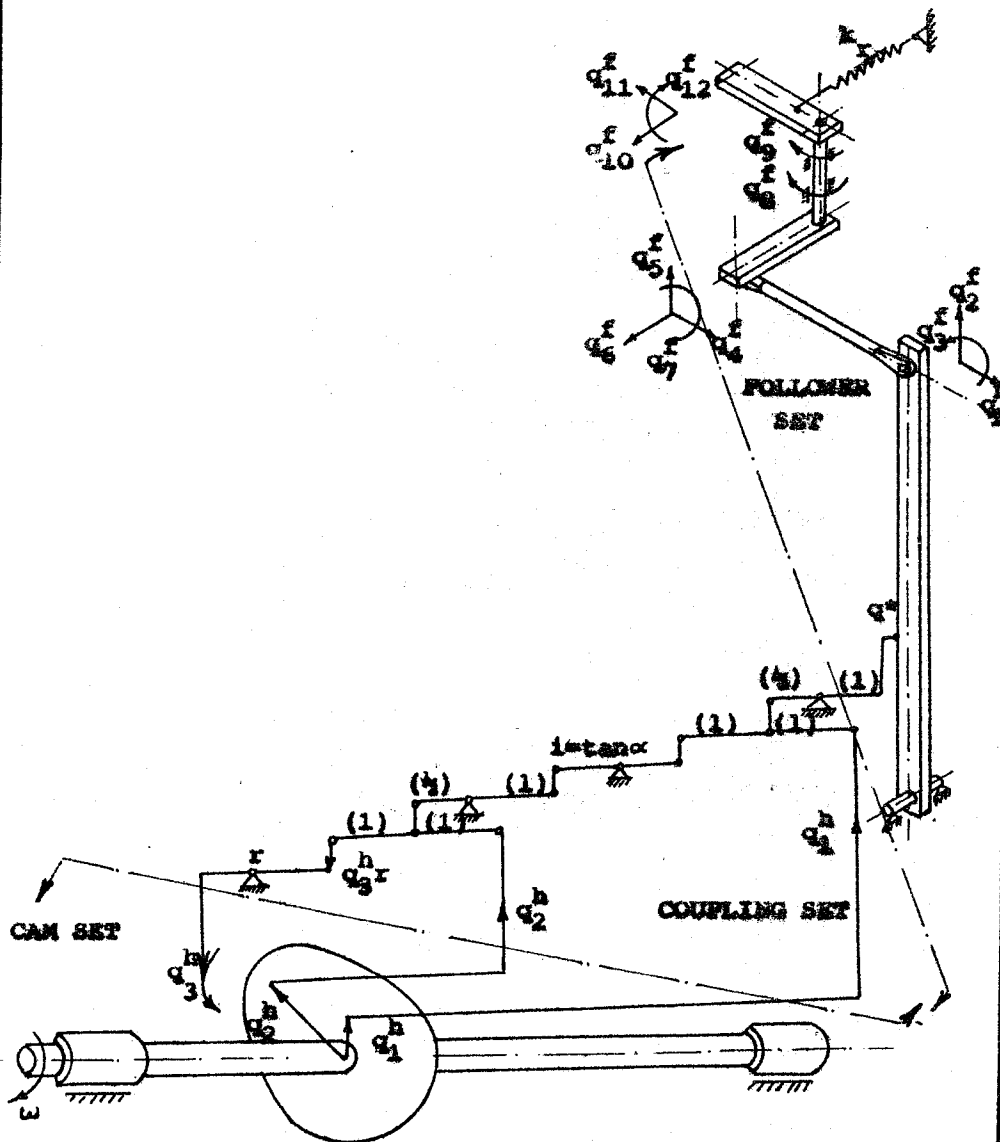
THE FOLLOWER, CAM AND COUPLING SETS COMPRISING THE CAM-OPERATED TRANSFER MECHANISM.
